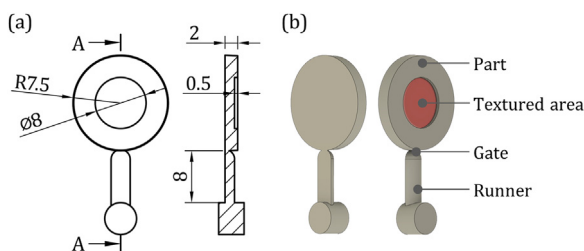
Molded samples (a) design and (b) location of the textured area (dimensions in millimeters).
